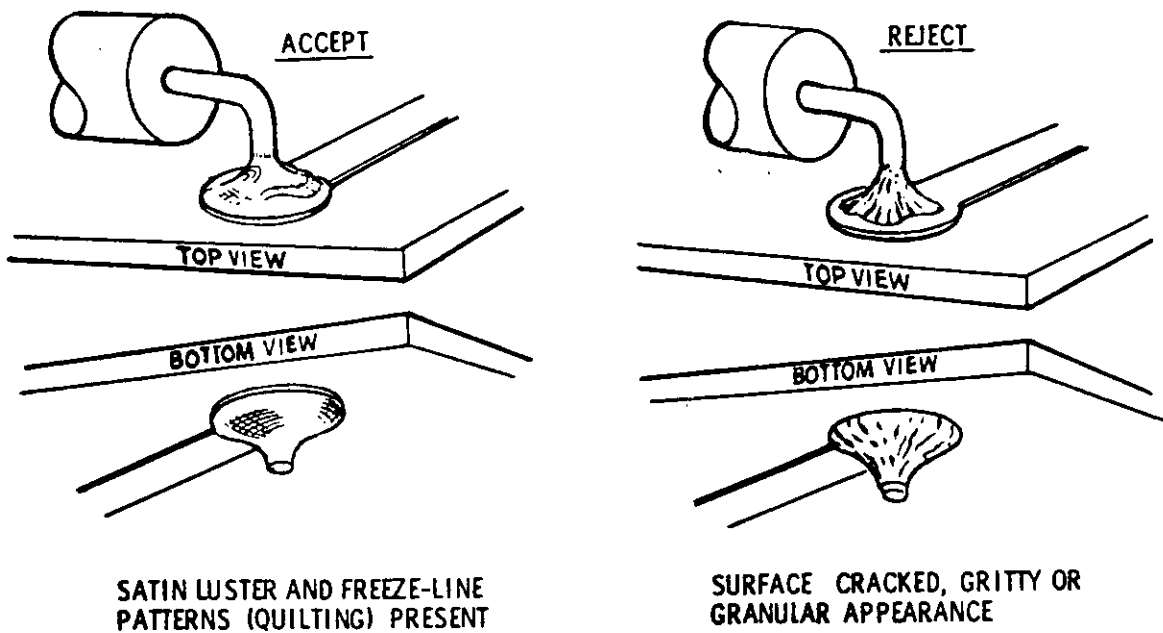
Plated-thru holes - solder surface characteristics.
